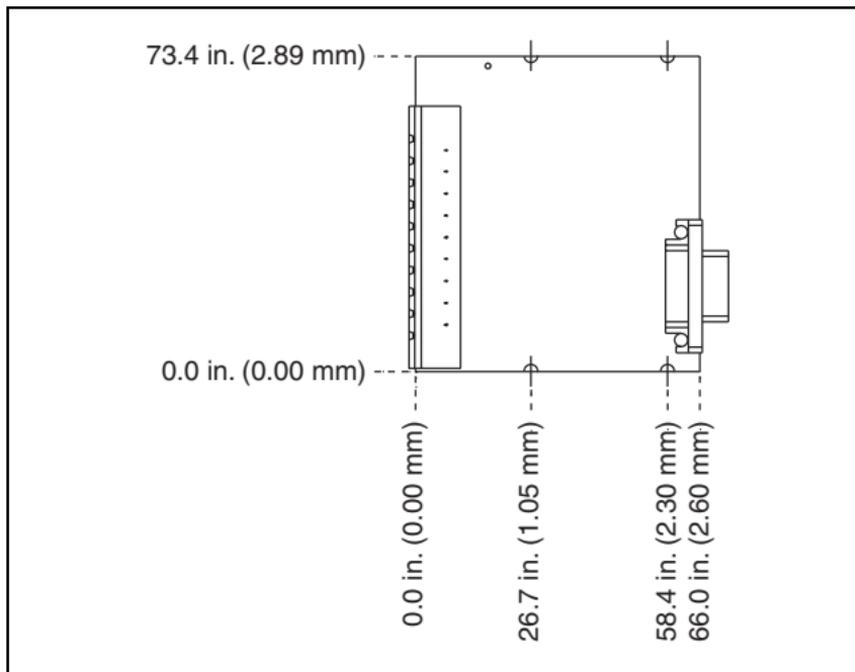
NI 9215E Dimensions in Millimeters (Inches)
